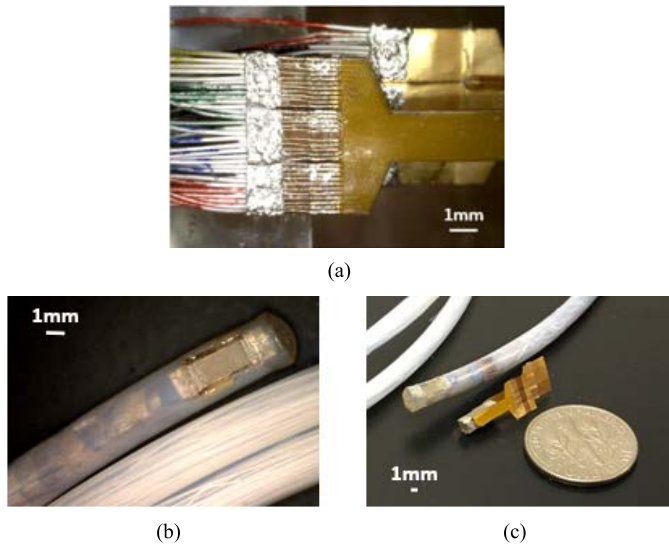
(a) Connection of the 48-AWG microcoaxial cable assembly to the flexible printed circuit. (b) Finished distal end with a  $7\text{-}\mu\text{m}$ -thick layer of vapor-deposited Parylene C to ensure complete insulation. (c) Size comparison of the finished distal end, the array acoustic stack-flexible circuit-backing layer module, and a dime coin.
